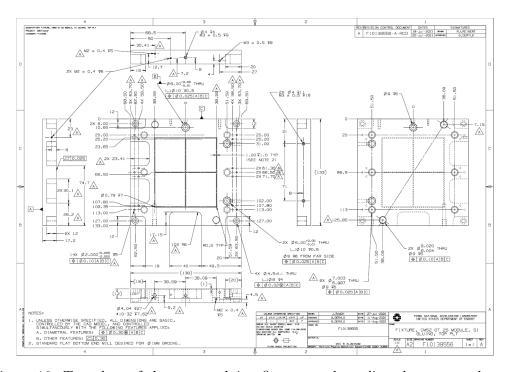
Top plate of the sensor gluing fixture used to align the sensor edges to the hole/slot features in the mounting bridge supports.
